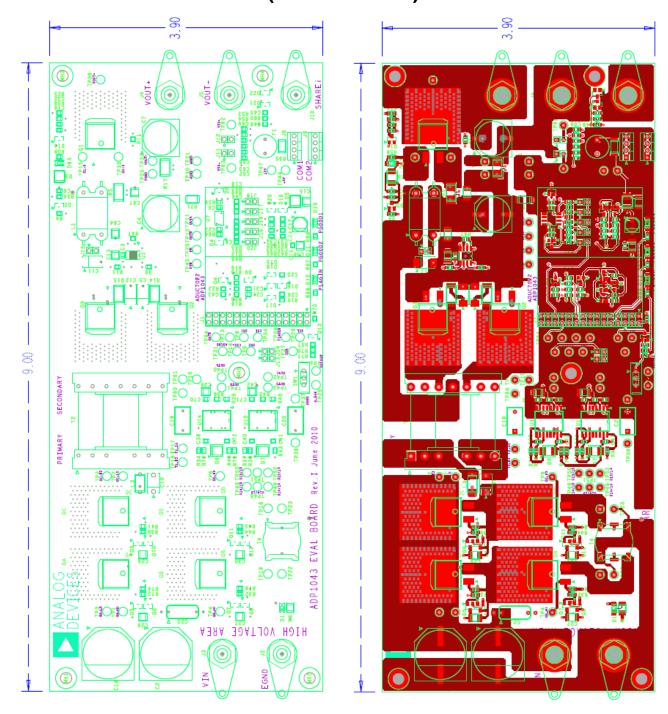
Layout, Silkscreen layer, dimensions in inches
